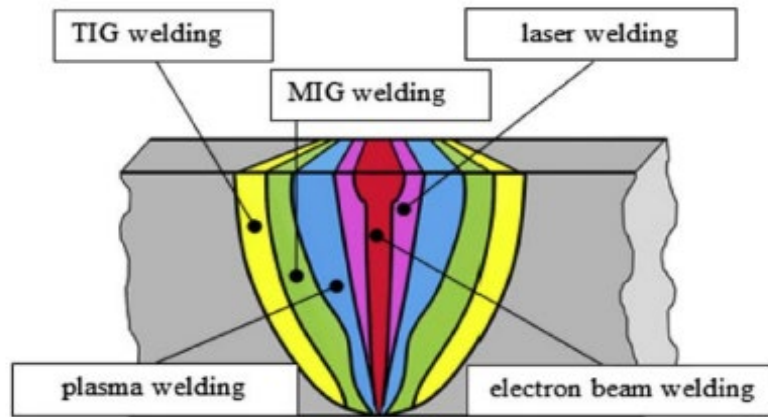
Different shapes and sizes of weld cross-sections obtained through various welding techniques(Donnini et al., 2025)
